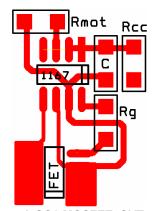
Single side board, SO8 MOSFET, OVT to VCC, solder side view.
